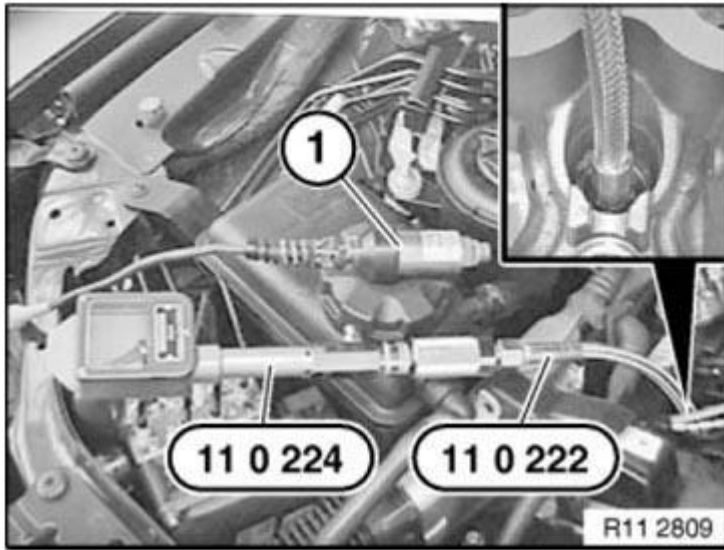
Installing Special Tool 11 0 222 Into Spark Plug Thread
